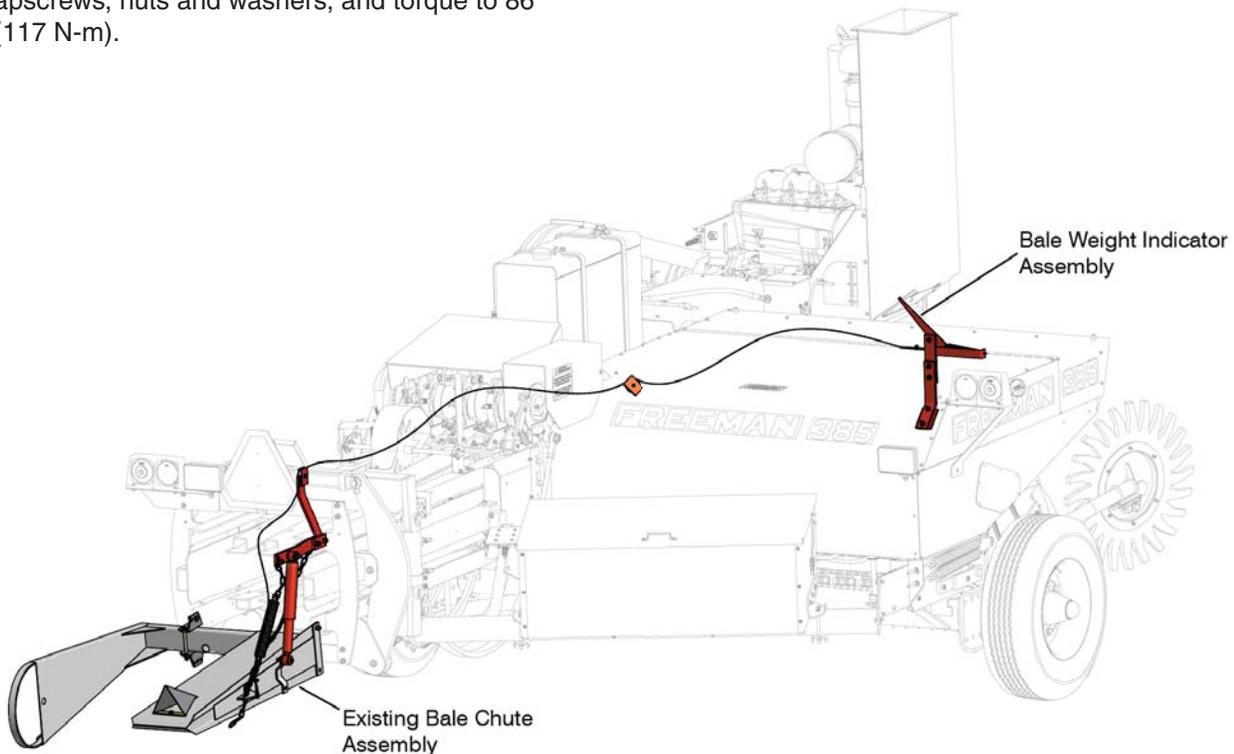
Remove existing Bale Chute Assembly and Bale Weight Indicator, if so equipped
